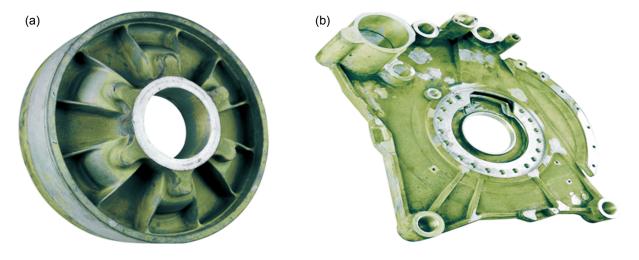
Squeeze casting wheel (a) and transmission supporting frame (b) [41-42]
